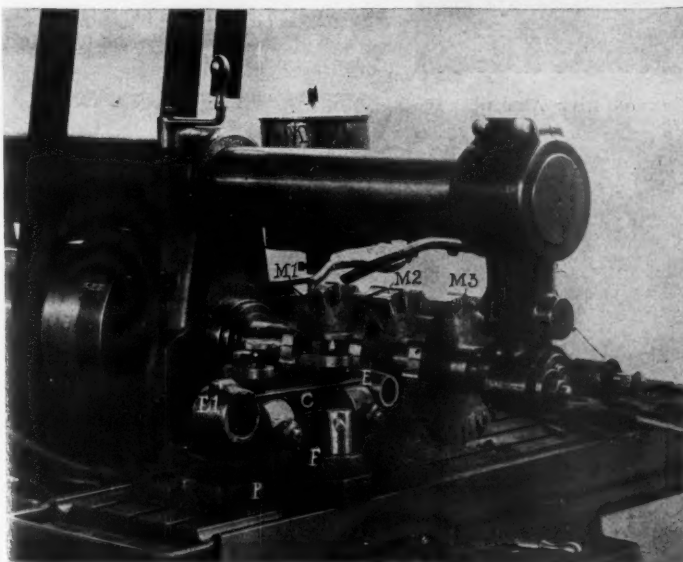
STRADDLE MILLS IN A MILLING MACHINE ON CONNECTING RODS
